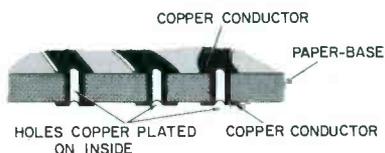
Drawing Showing Details of Copper Coating on Both Sides of Board and Through Holes.
